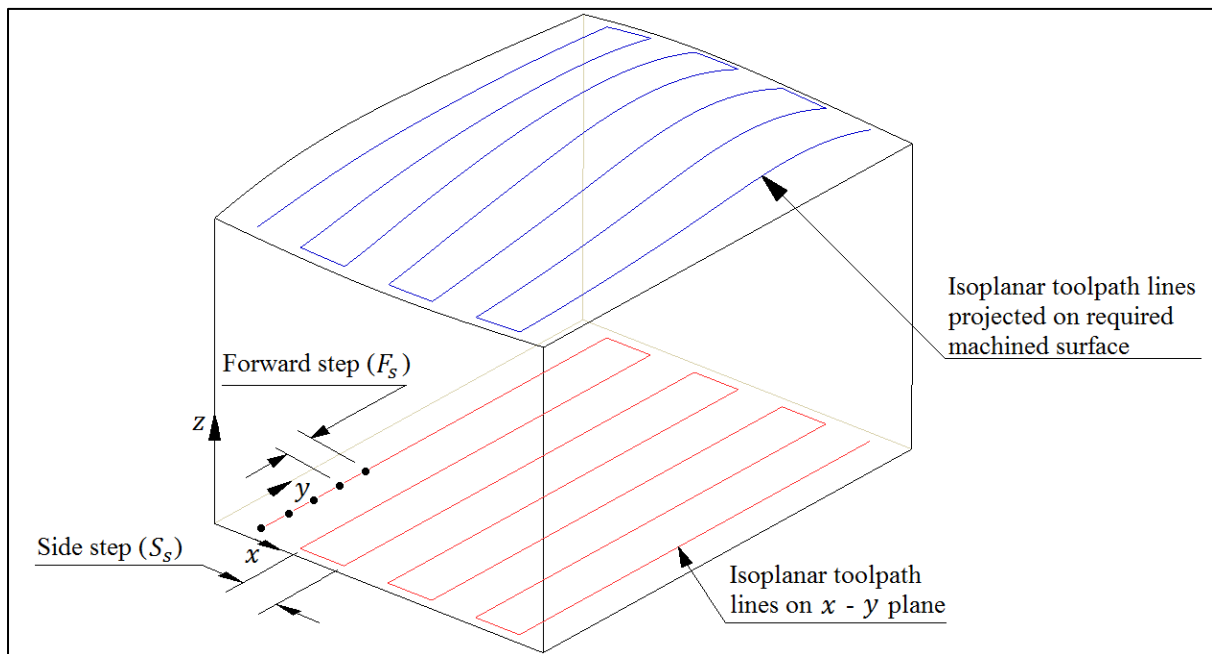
Iso-planar tool path lines projected on required machined surface
